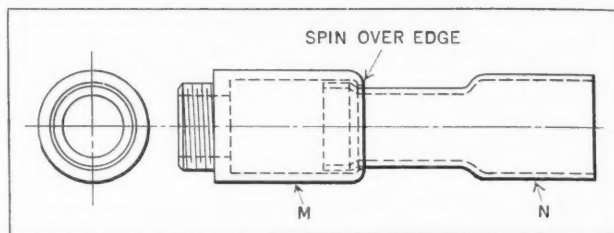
Method of Assembling Part N Formed on Die Shown in Fig. 2
